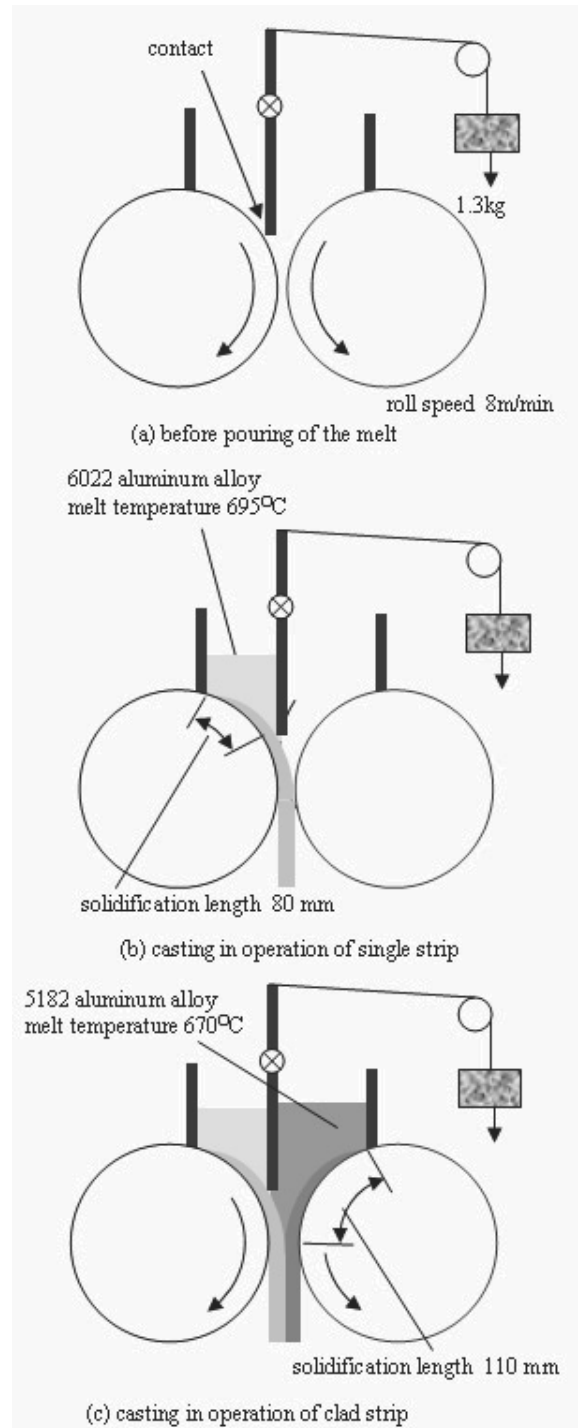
Schematic illustration showing the operation of the casting of the clad strips
